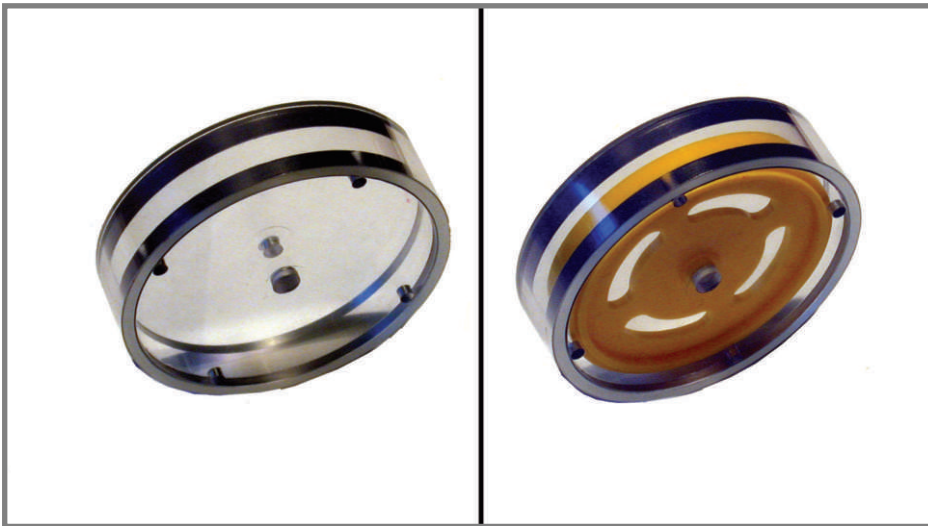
The completed mold, without wheel (L) and with the wheel inside (R).
